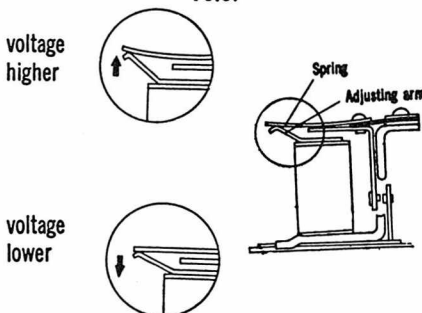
View of charging relay showing adjustment. Cut-in voltage should be 12.0-15.6.
